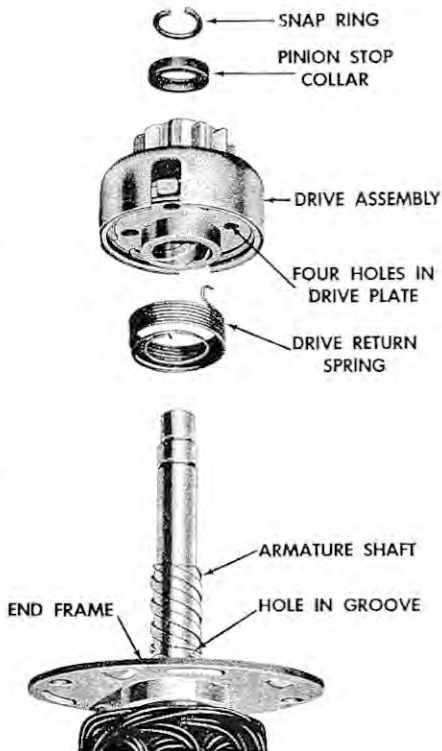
Exploded view of Delco-Remy Inertia Type starter drive, showing component parts.
